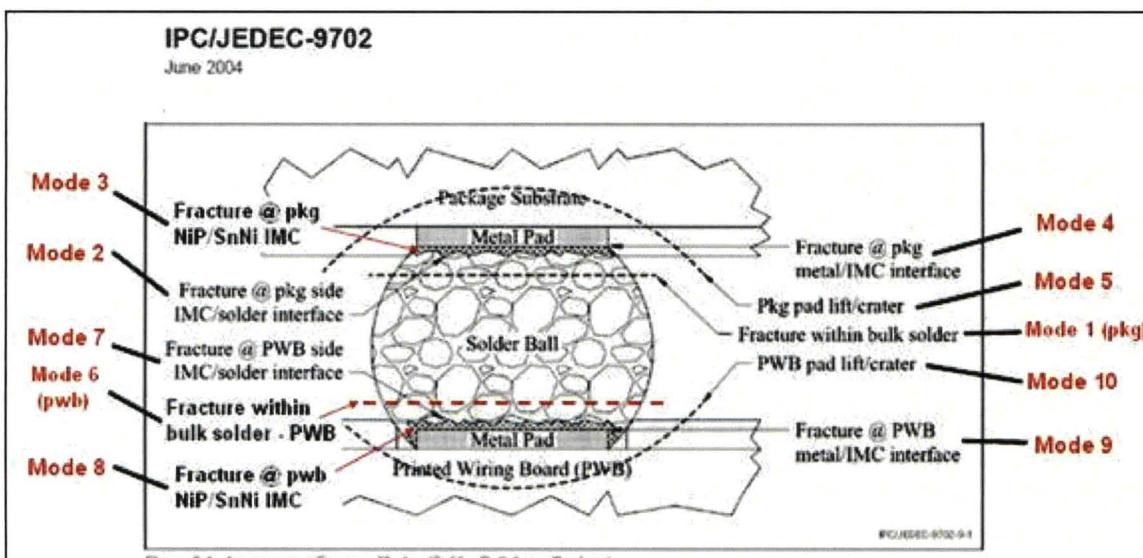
Interconnect Fracture Modes (Solder Ball Array Devices)
